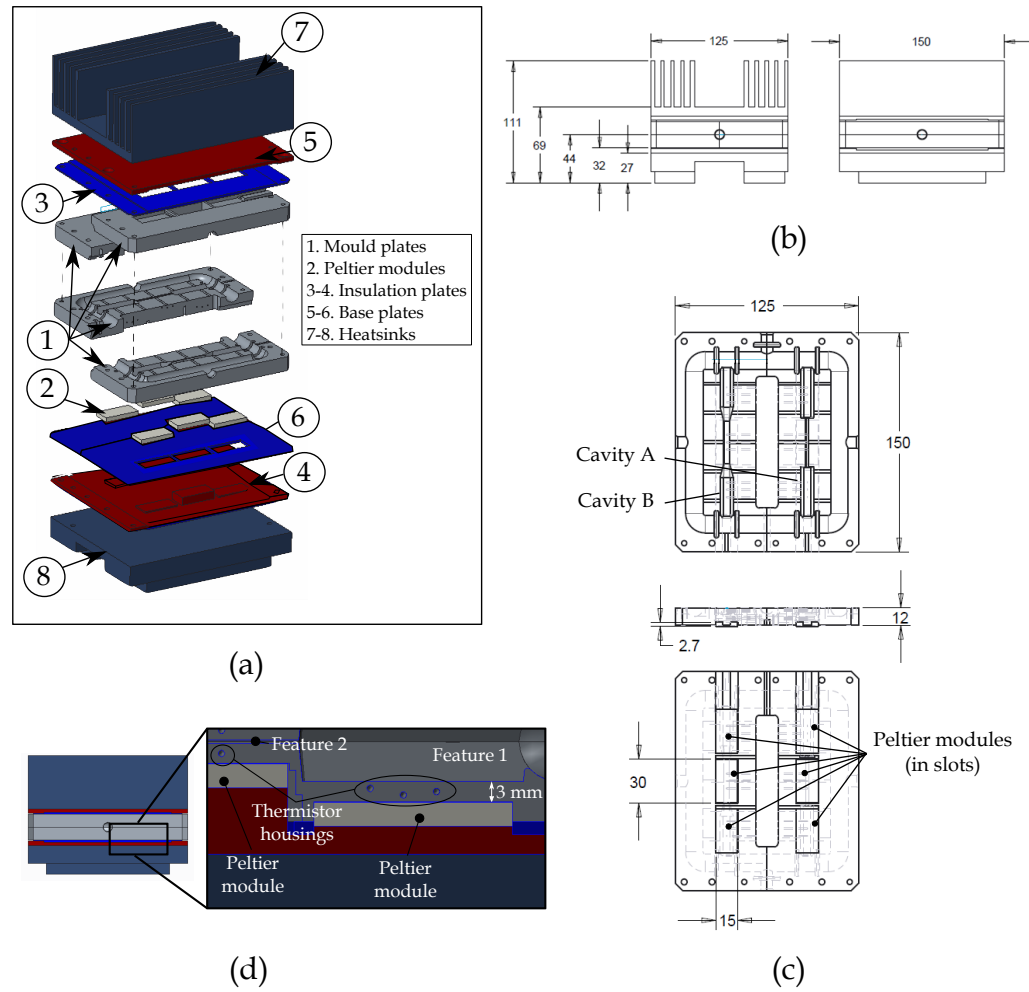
Prototype of the novel mould tool. (a) Exploded view of the assembly. (b) Main dimensions. (c) Mould cavity, main dimensions. (d) Cross section of the mould, showing Peltier modules and thermistor housings locations.
